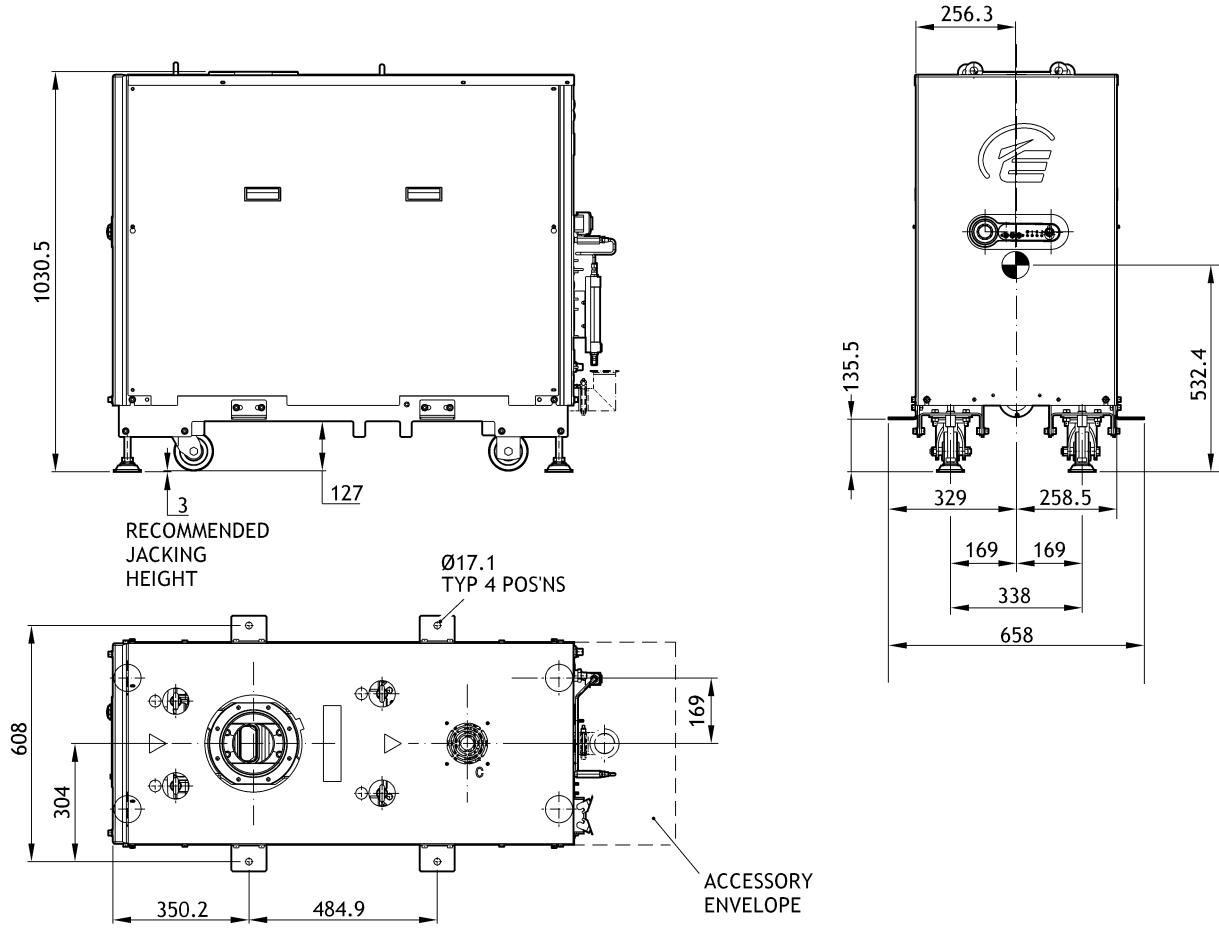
GXS450/2600 installation drawing (Sheet 2)
